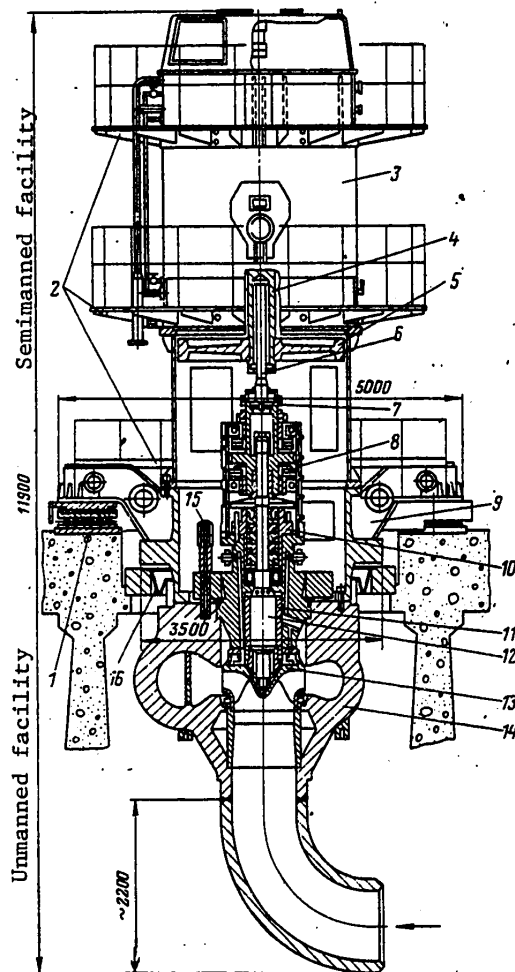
TsEN-195 main circulating pump with high flow rate ( $Q = 19,000 \text{ m}^3/\text{hr}$ ). 1--hydraulic ball-bearings; 2--service platforms; 3--electric motor; 4--electric motor shaft; 5--flywheel; 6--shaft; 7--coupling; 8--radial thrust bearing; 9--pickups; 10--seal assembly; 11--lower radial hydrostatic bearings; 12--pump shaft; 13--impeller; 14--housing; 15--pins and flange of the main parting seal; 16--diaphragm for sealing the span between floors.
